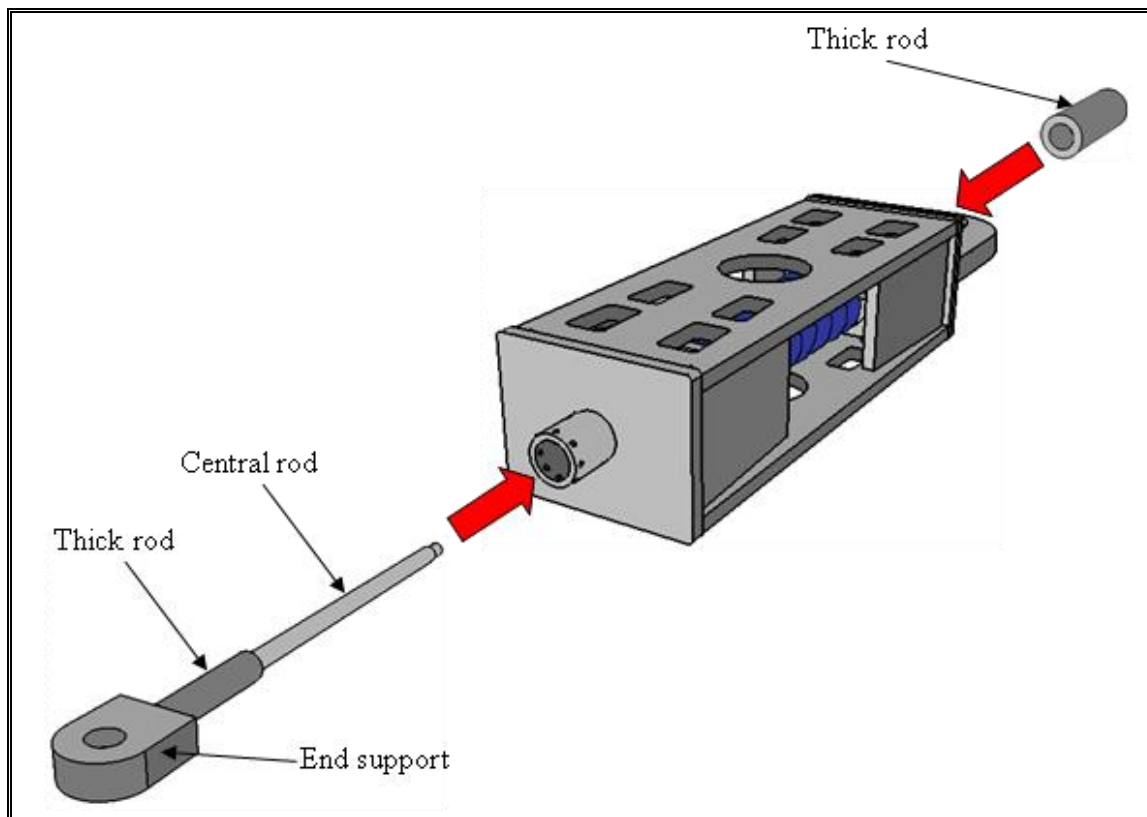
Assembly of the central rod, the thick rods and the remaining end support
